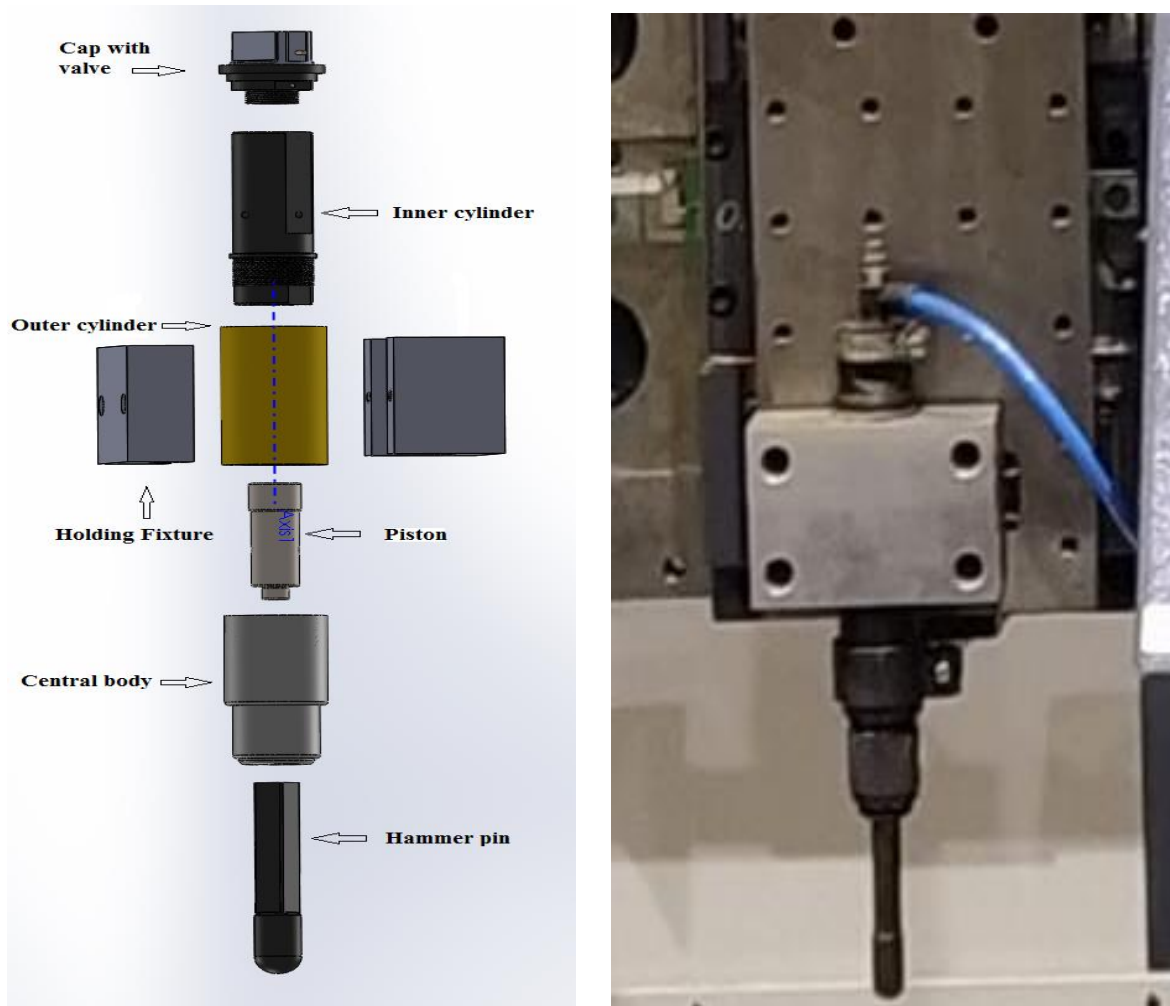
Setup for Pneumatic hammer (a) CAD Model; (b) Actual Model
